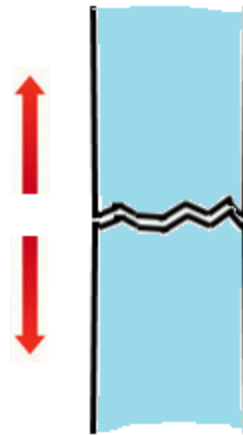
DUCTILE AND BRITTLE FRACTURE
